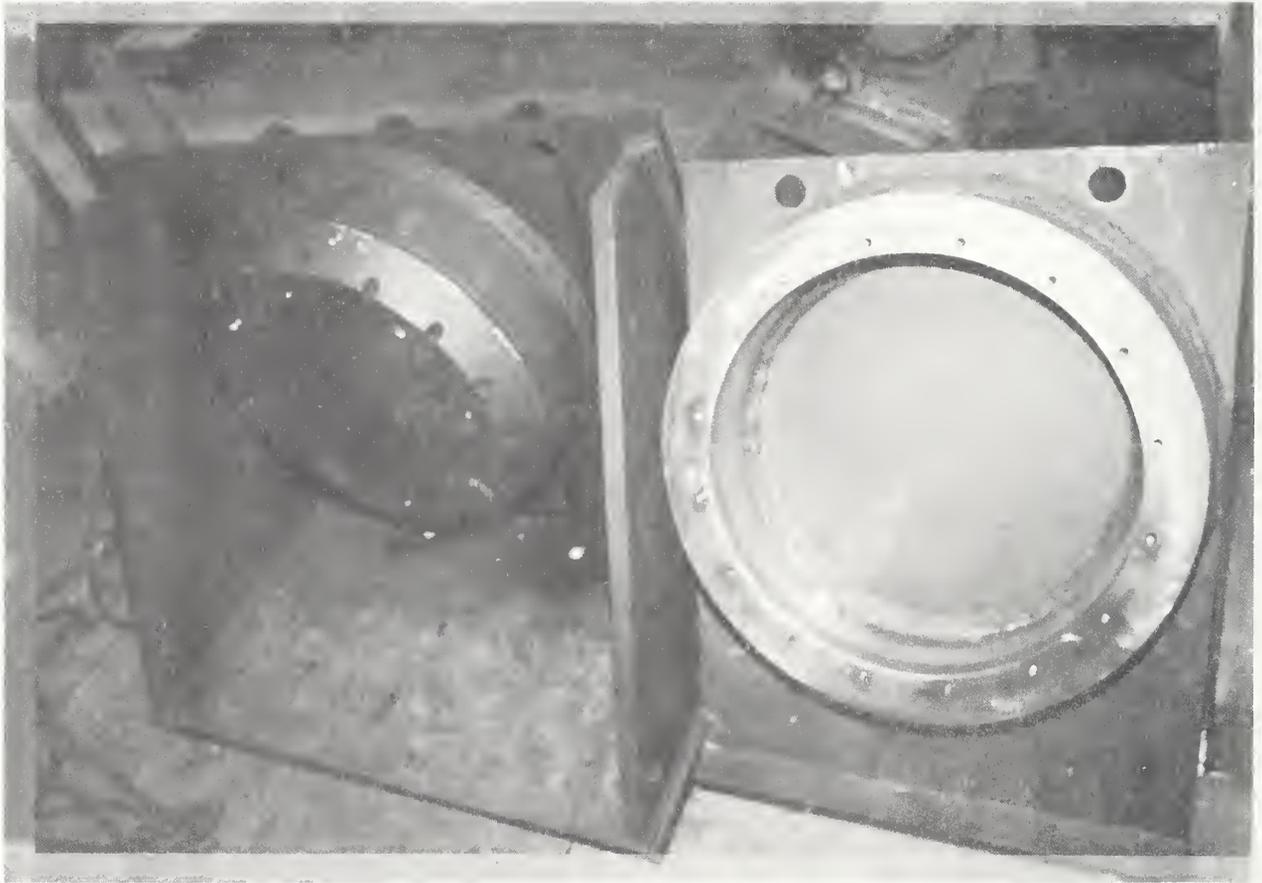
Test Fixture with Adapter for Test S-4 (left) and Test Fixture without Adapter for Test S-1 (right)
